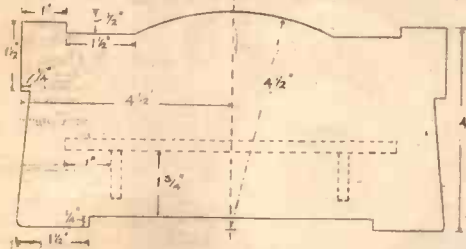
The layout of the back, with all the necessary measurements for the outline and the position of the shelf.
